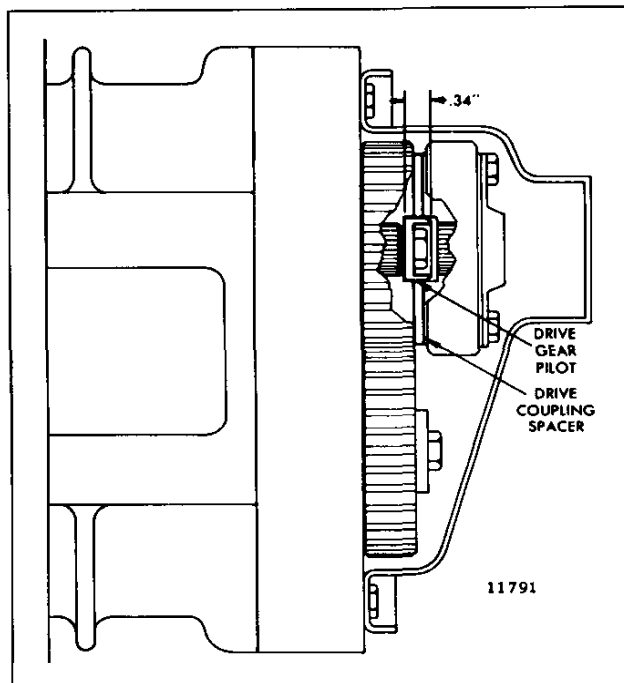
Current Pilot and Spacer Used on 4-53 Blower
